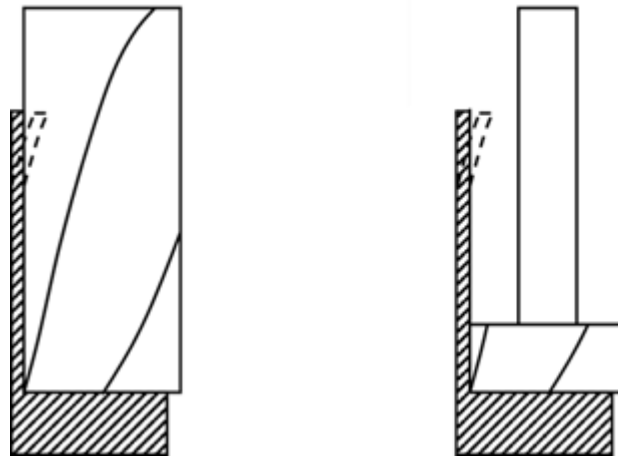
Machining of a thin-wall workpiece with conventional tool (left) and relieved tool (right) [4].
